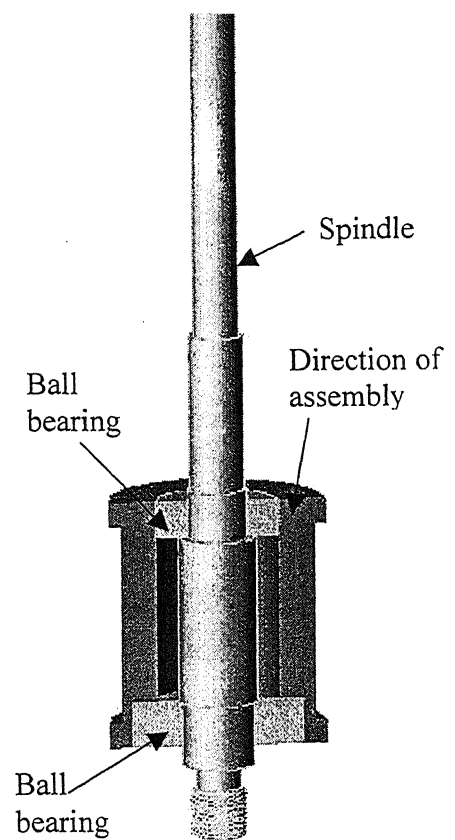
3D picture of the schematic view of spindle and housing assembly [housing and bearings sliced for clarity]
